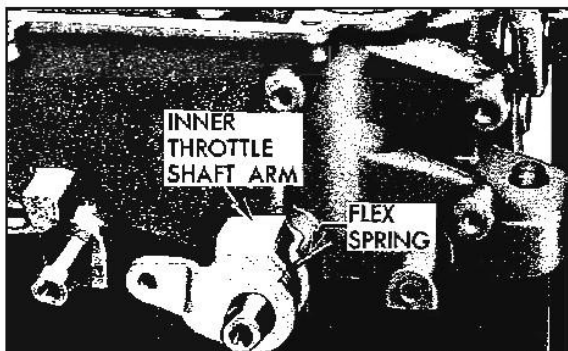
B-88 Inner Throttle Shaft Arm and Flex Spring Installed
